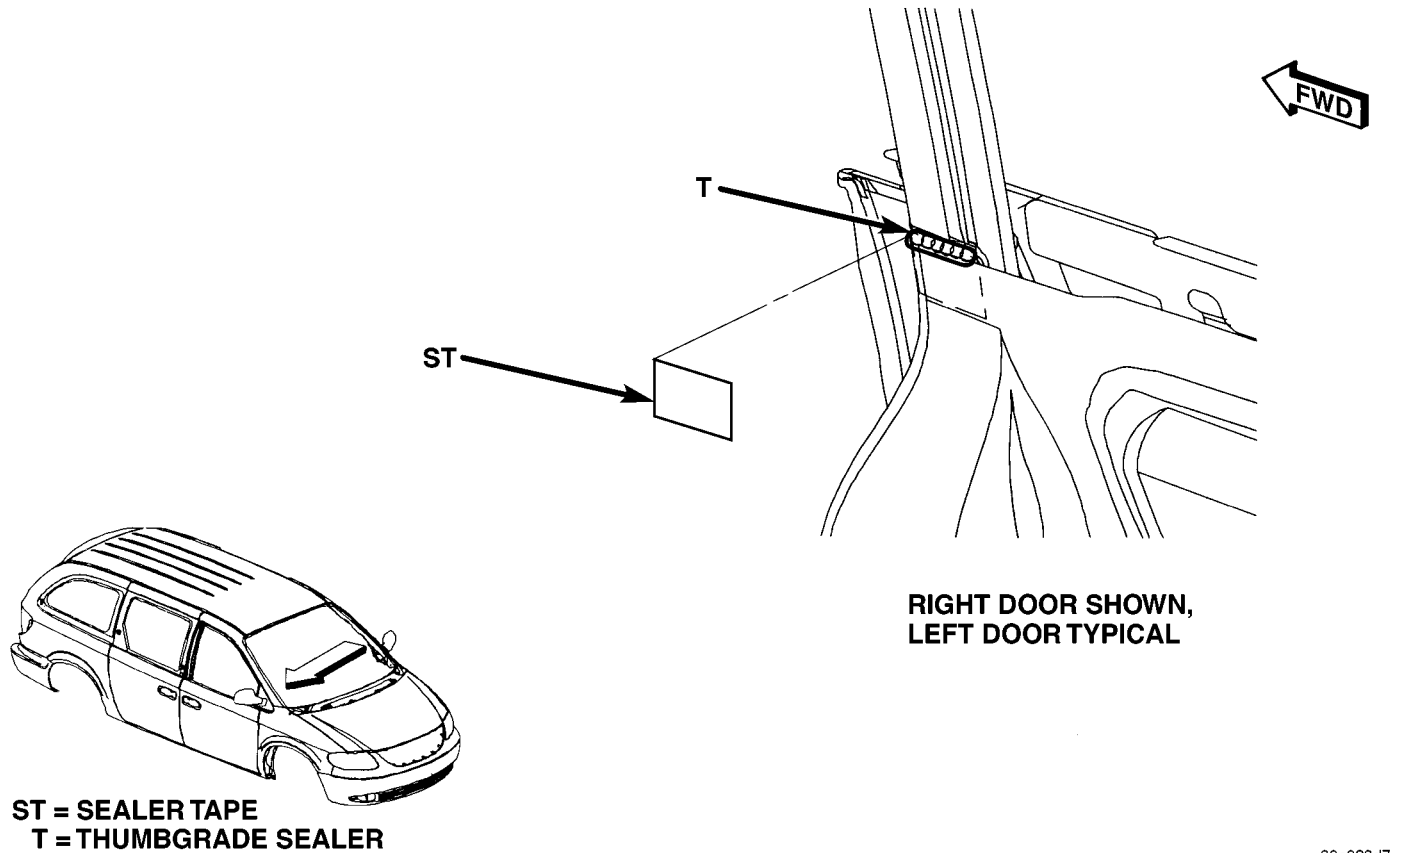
FRONT DOOR BELT DOOR BELT SEAMS (FRONT)
